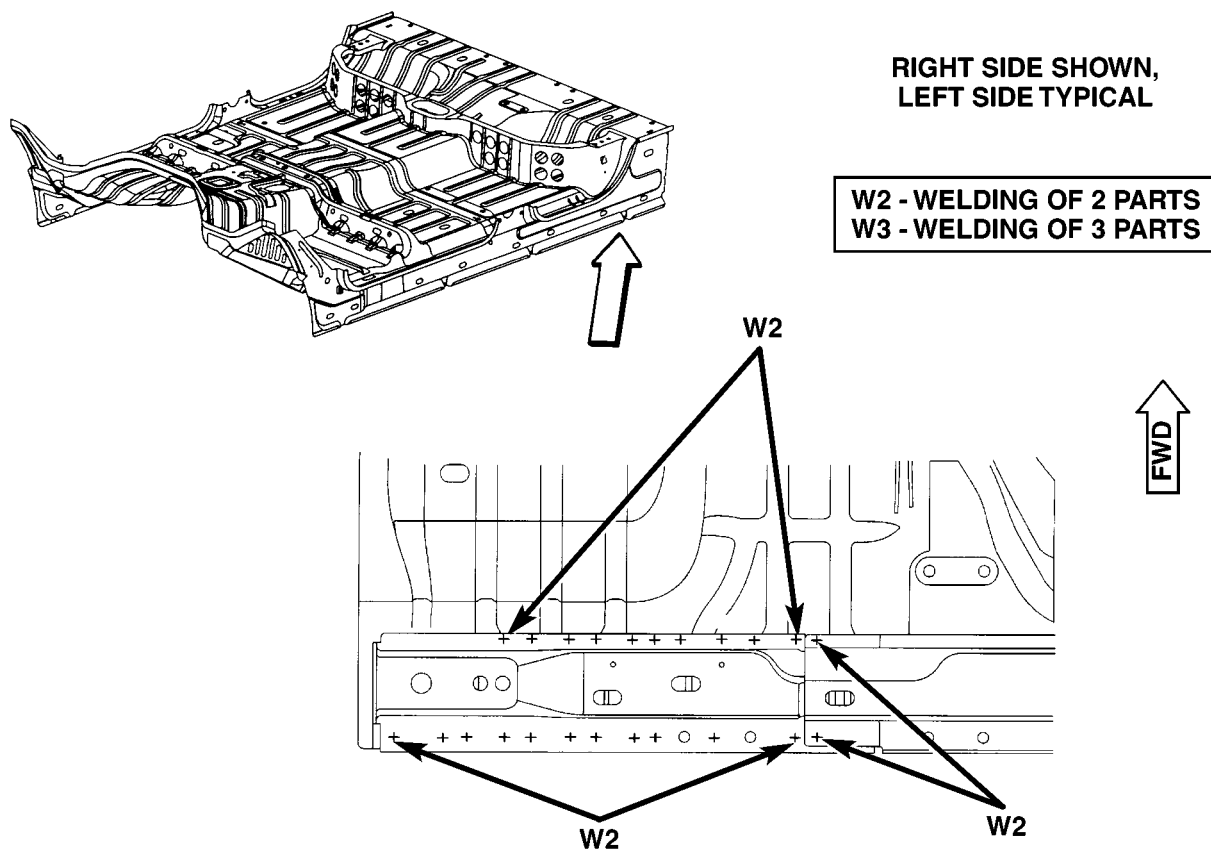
LEFT REAR CROSSMEMBER - QUAD CAB
